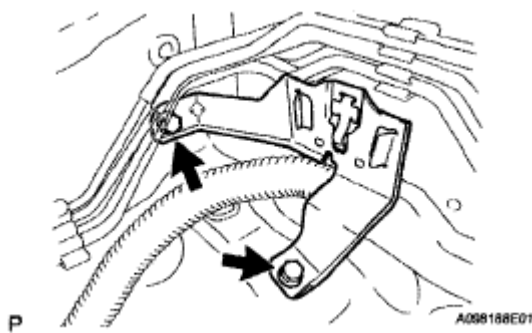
Locating Oil Reservoir Bracket And Bolts
